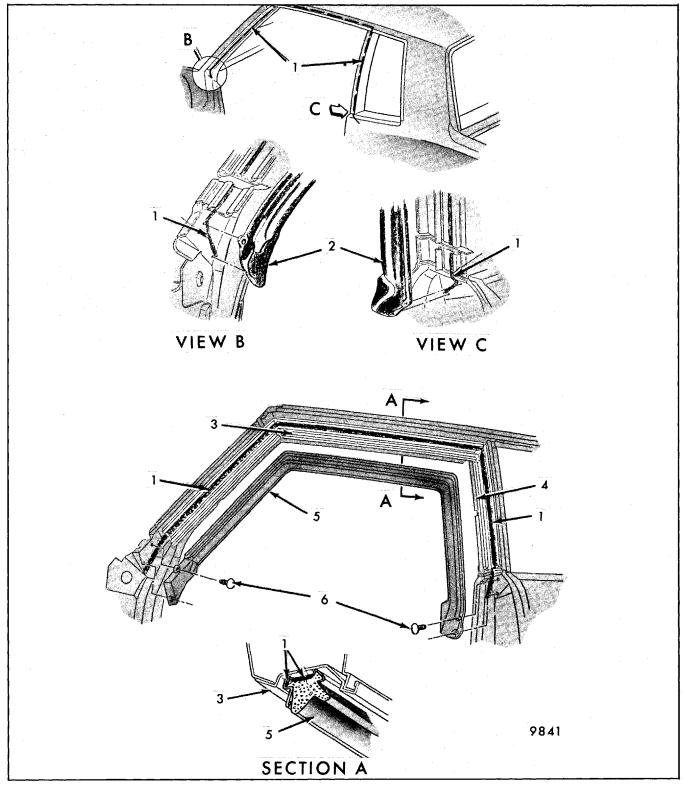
Side Roof Rail Weatherstrip and Weatherstrip Retainer - A-37 Style Shown, Other Styles Similar
